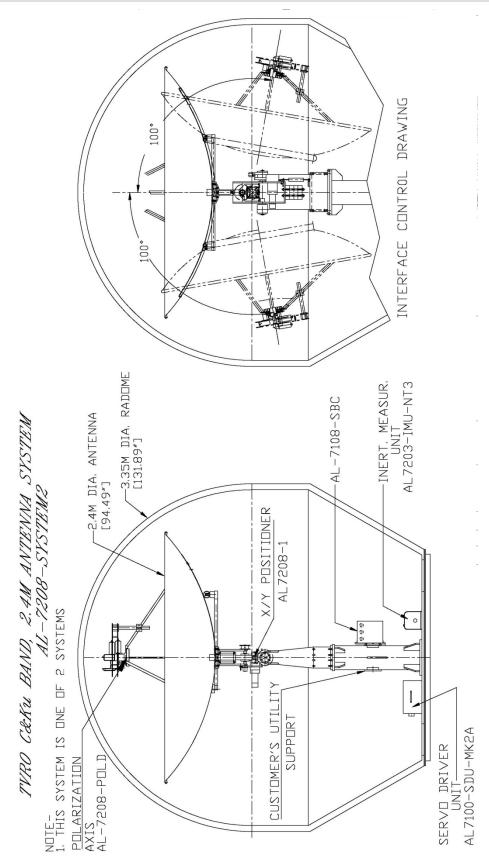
Above Deck Equipment (ADE) Layout and Dimensions (1 of 2)
